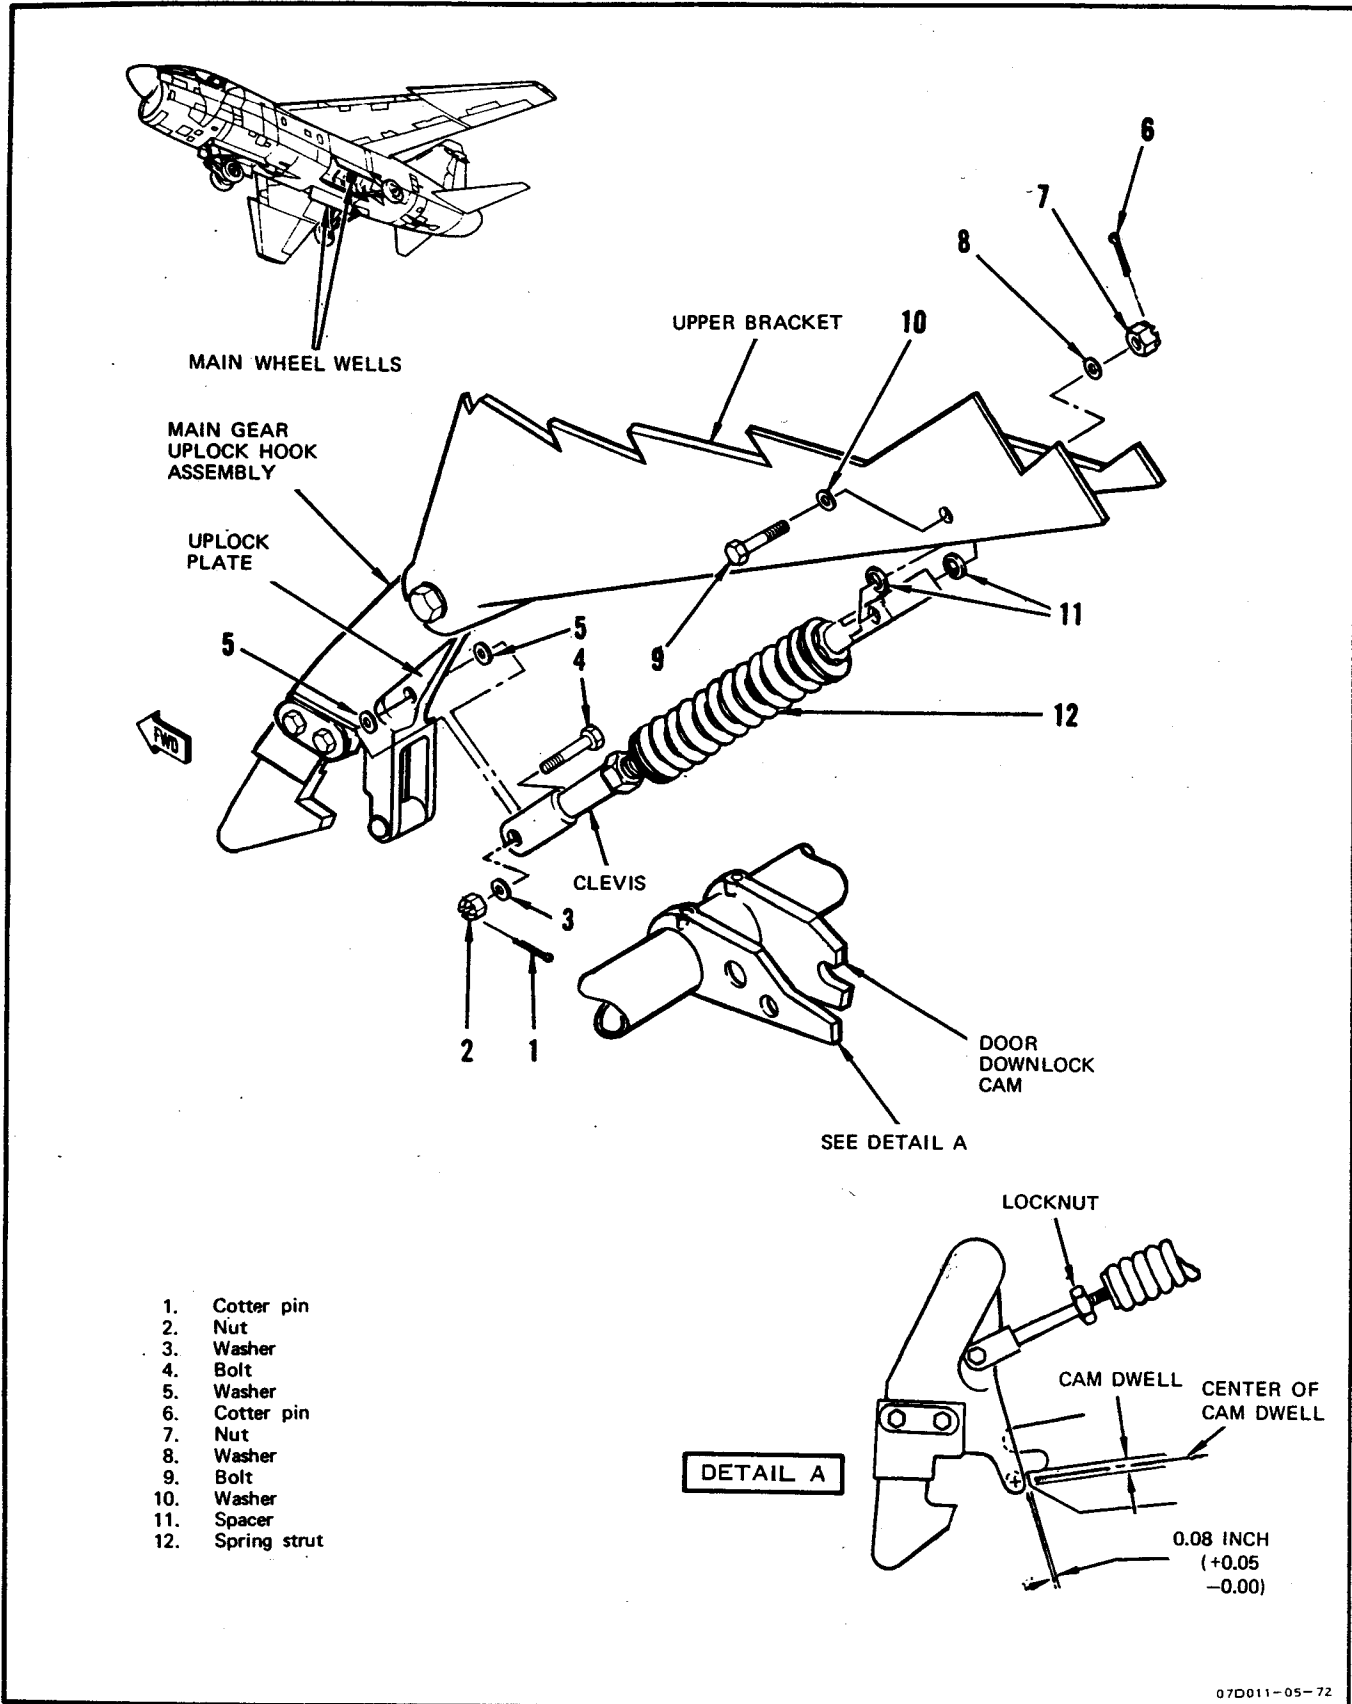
Main Gear Uplock Spring Strut Removal and Installation
